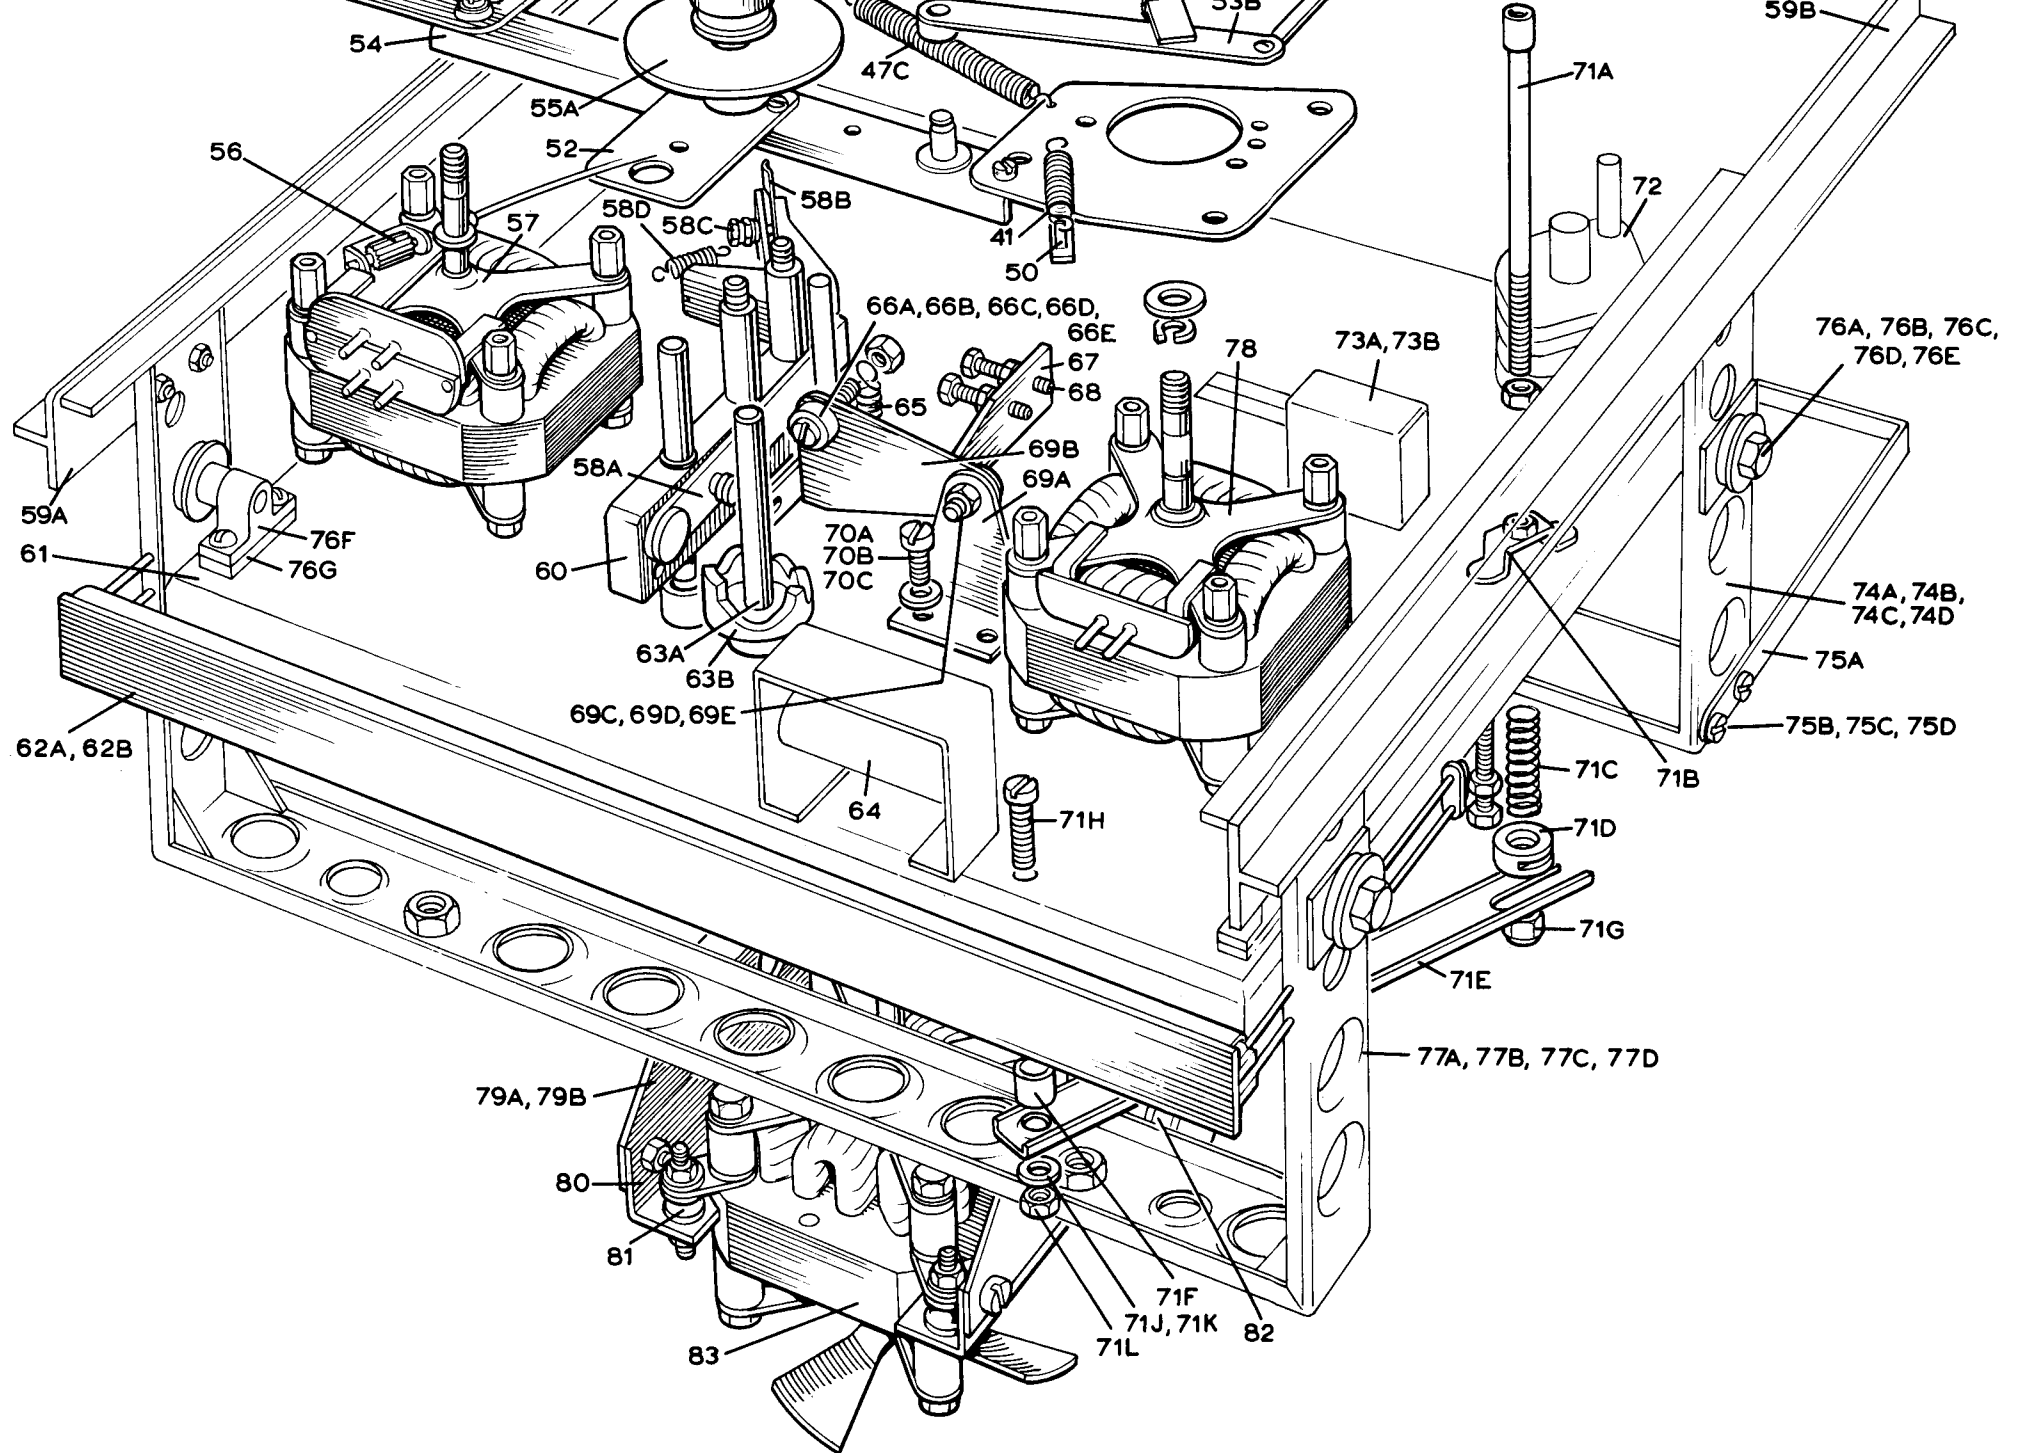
EXPLODED VIEW OF TAPE-DECK (PARTS LIST IDENTIFICATION)
